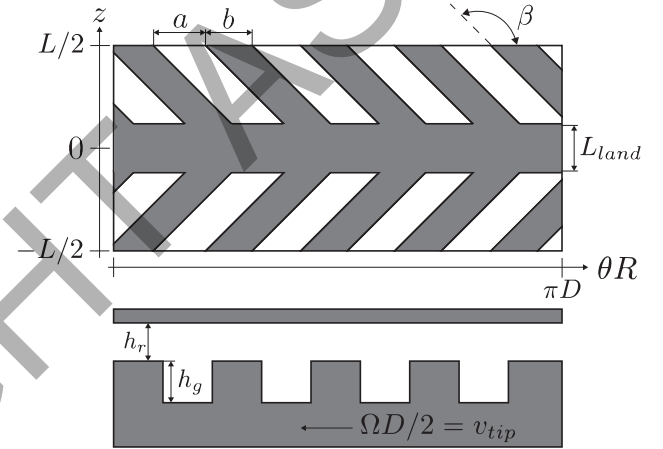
UNWRAPPED TOP AND CUT VIEWS OF THE HERRINGBONE GROOVED JOURNAL BEARING (HGJB) AND ITS PARAMETERS.
